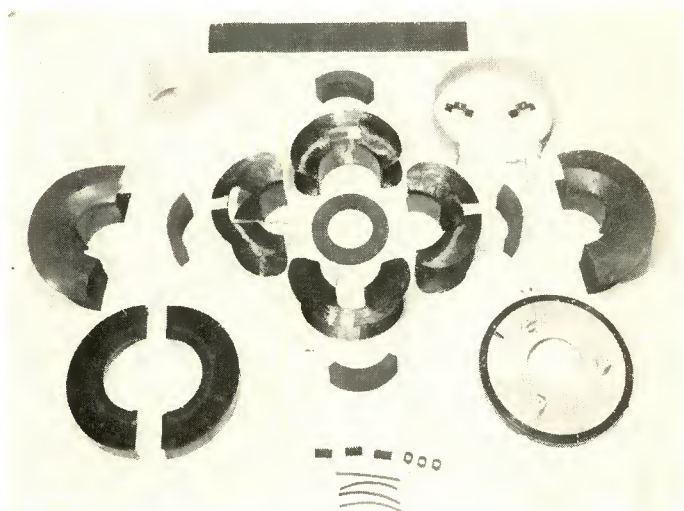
Disassembled parts of deflecting yoke 230FD1.
